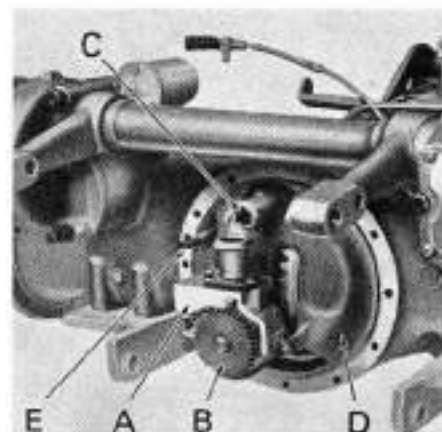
View with PTO housing and gear assembly removed showing early type (Dowty) pump (A).
